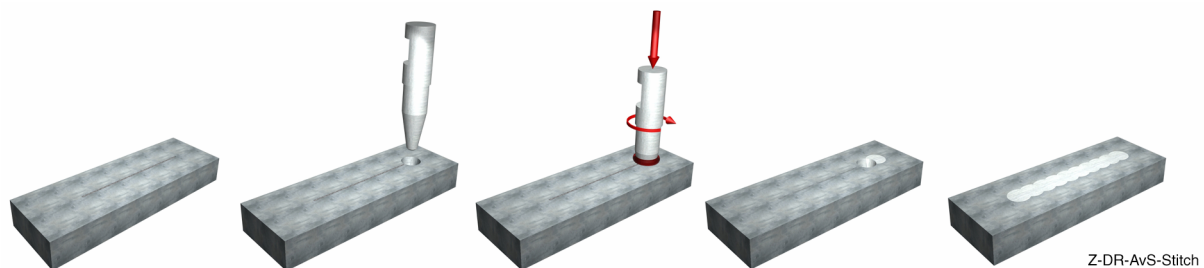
Schematic illustration of the friction stitch welding process.
